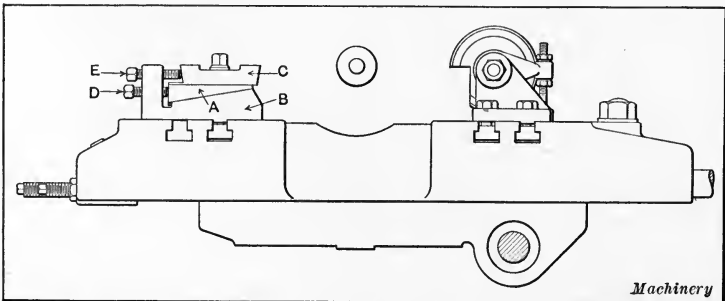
Arrangement of Cross-slide Forming and Cutting-off Tools used in Connection with Operations shown in Fig. 22
